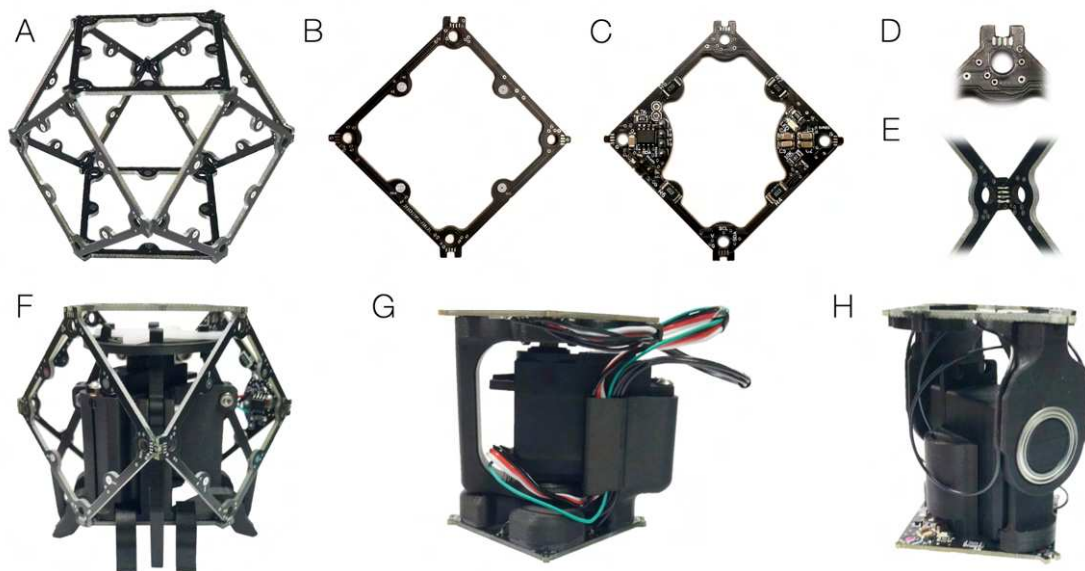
Functional voxels and robot modules. A) A fully assembled functional voxel comprised of six PCB faces. B) The basic frame face, which routes four lines and carries no components. C) The ATtiny412 face, which controls the motor in each module. D) A close up view of the inner-voxel solder joint of one face. E) A close up view of a soldered inner-voxel joint. F) The gripper module. G) The wrist module. H) The elbow module.
